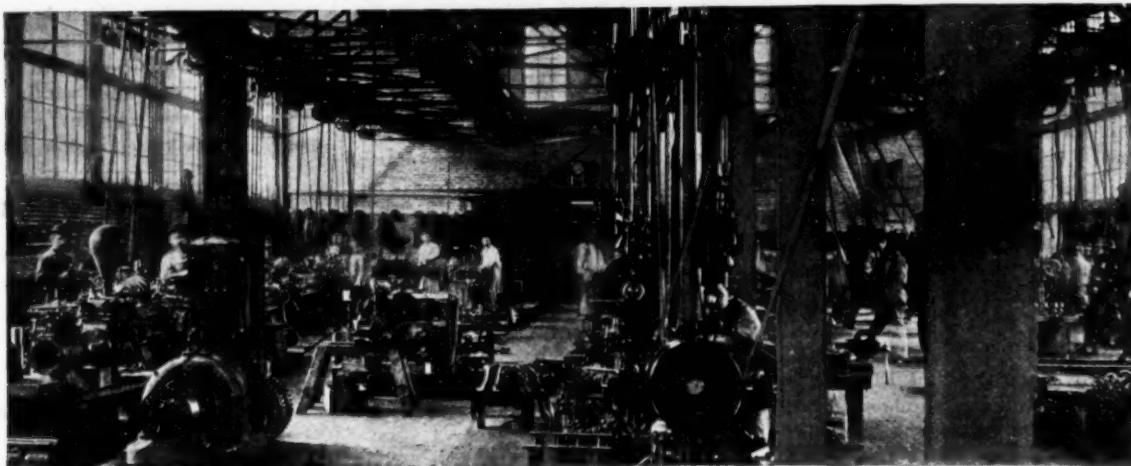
TWENTY HORSE-POWER INDUCTION MOTOR DRIVING TOOL-MAKING AND OTHER MACHINERY.
